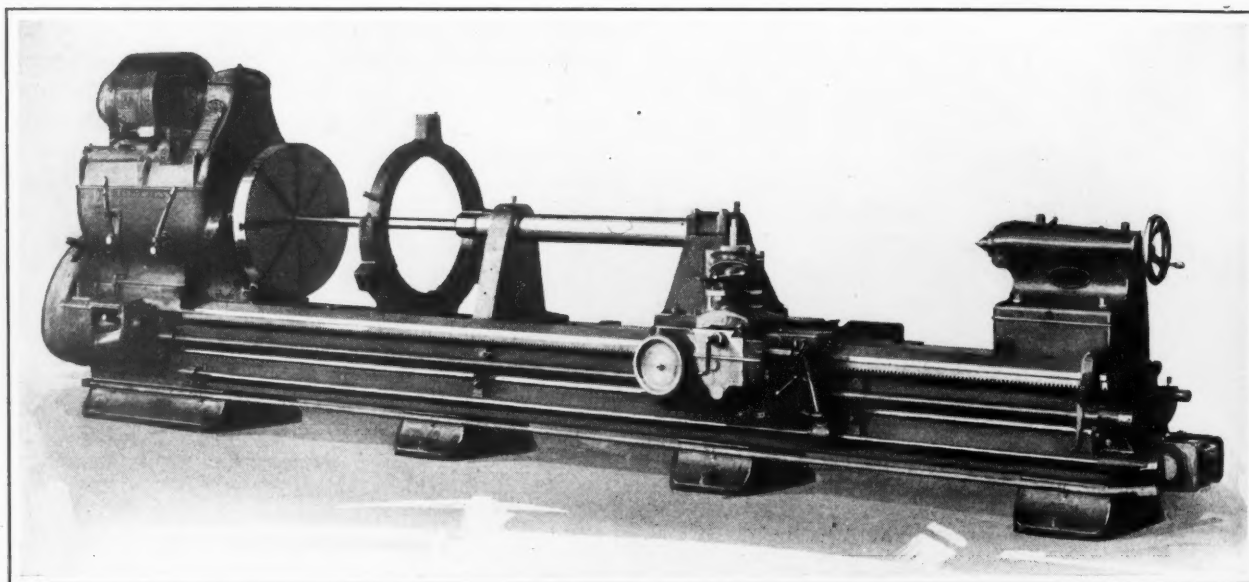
"Time Saver" Lathe equipped for Turning, Boring and Recessing Locomotive Cylinder Bushings
